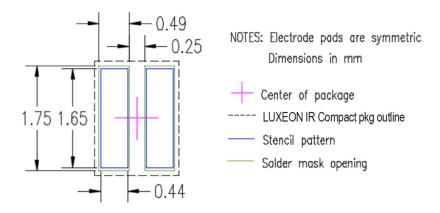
Recommended PCB Footprint for LUXEON IR Compact.
